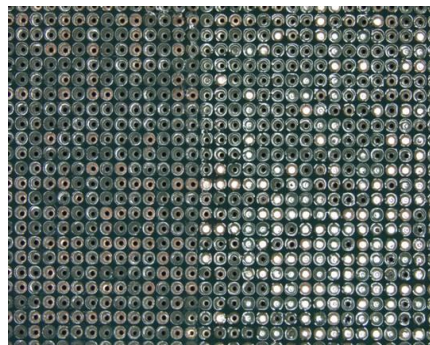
Board assembled with ROM1 wave soldering flux after 5 days MFG test
